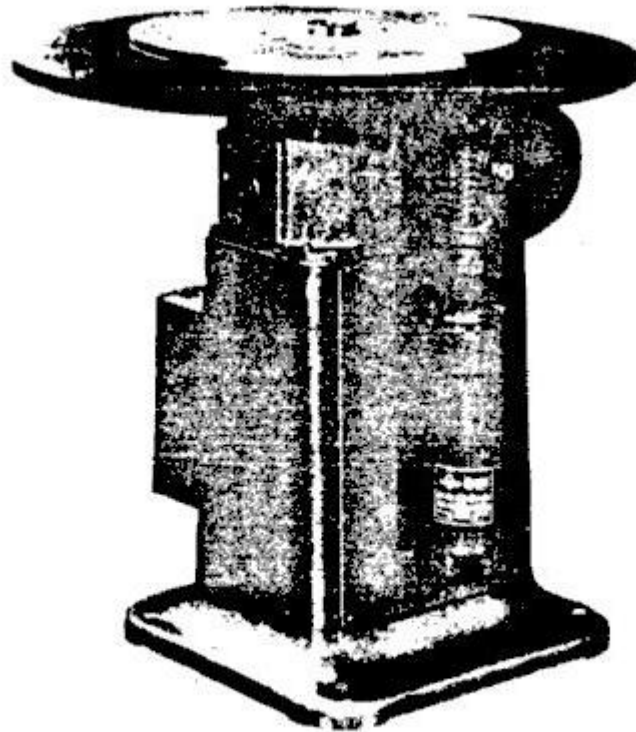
Standard rotary table component used on dial indexing machines.
